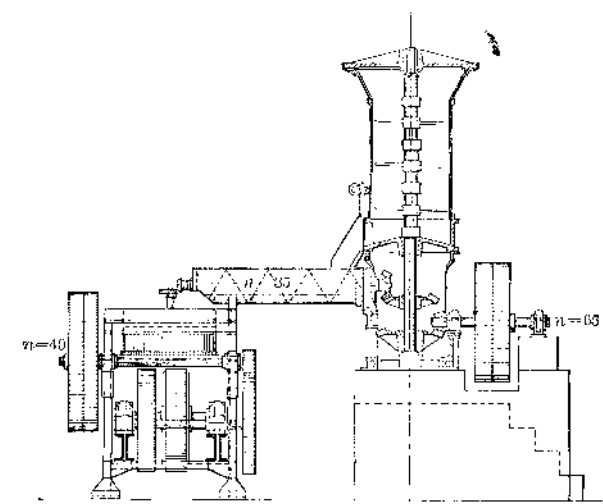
ARRANGEMENT OF BRIQUETTING PRESS PROVIDED WITH KNEADING MECHANISM. LONGITUDINAL SECTION.
